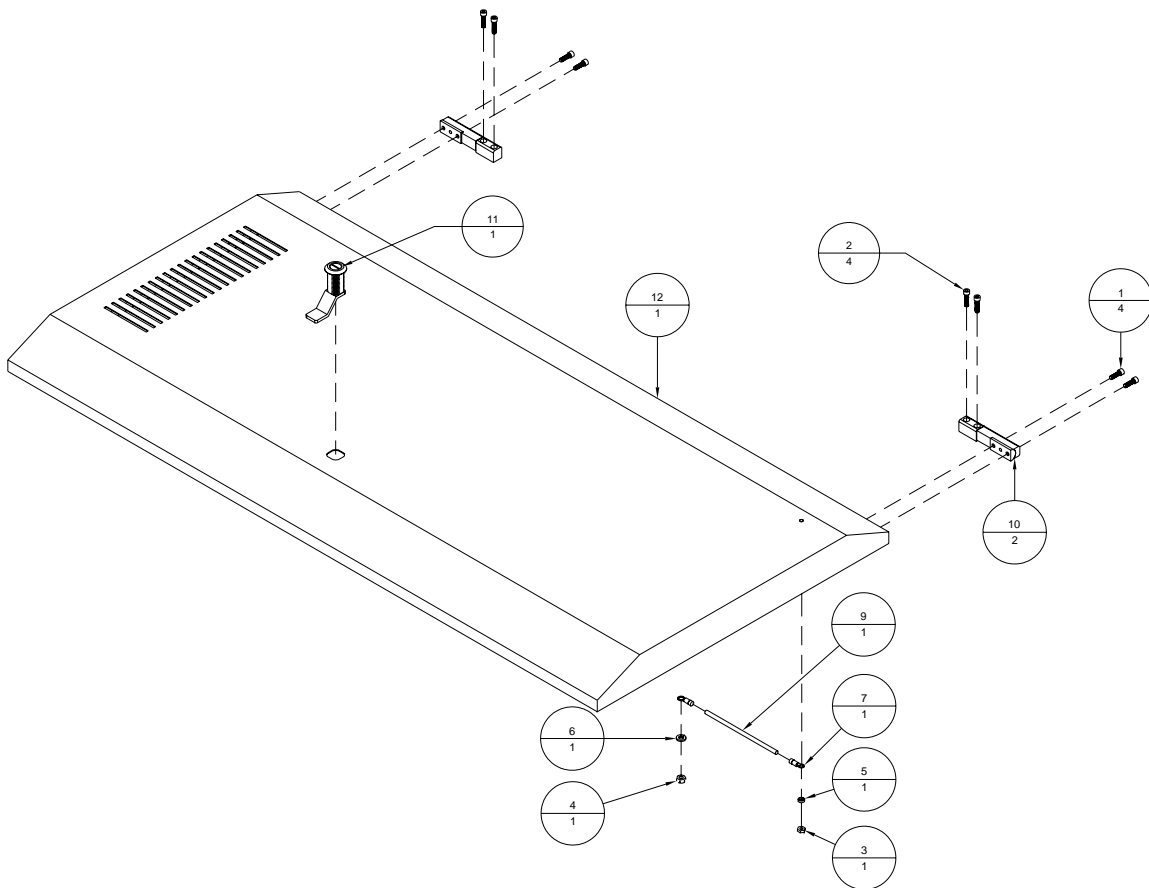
Side Door Assembly, Right, BK1700 (9103408A)
